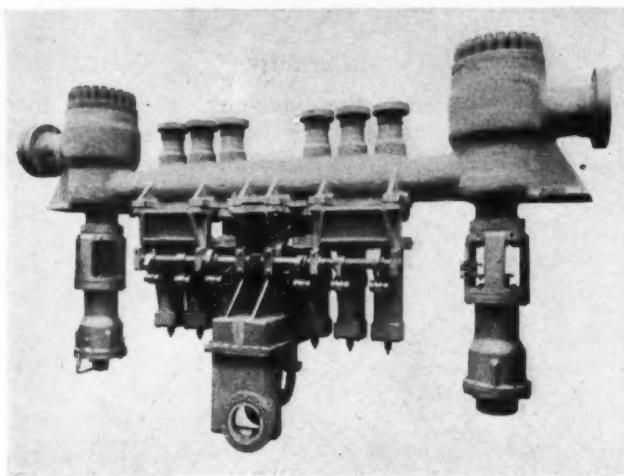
Hydraulic gear and steam-admission-valve casing unit
